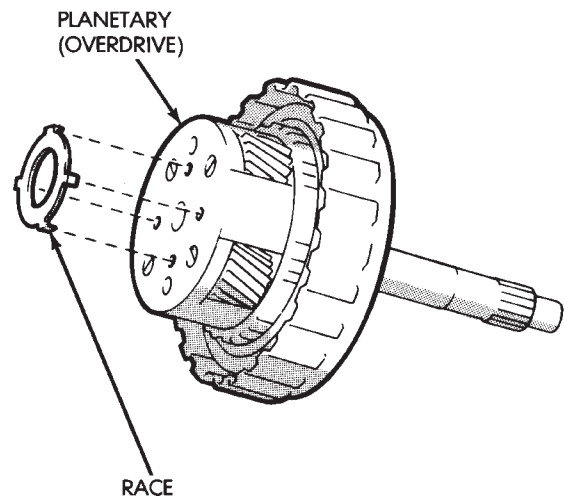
Removing Fourth Gear Planetary And Direct Clutch Assembly
